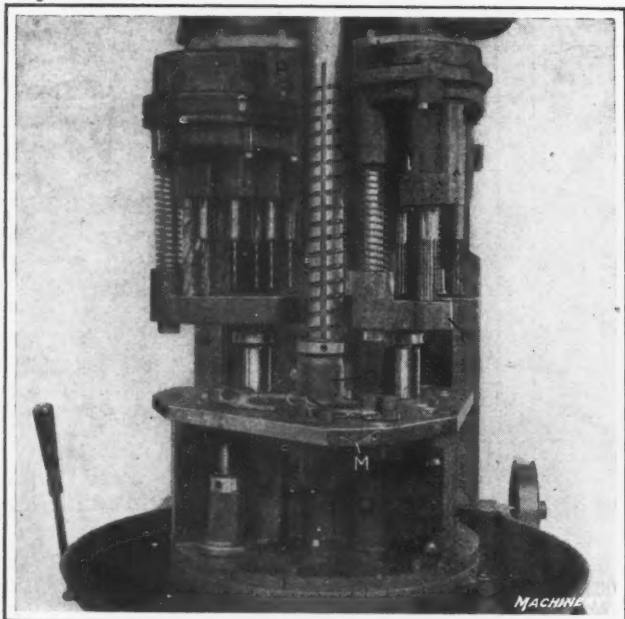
Close-up View of Tools used for drilling and reaming Motor Car Brake Spiders
